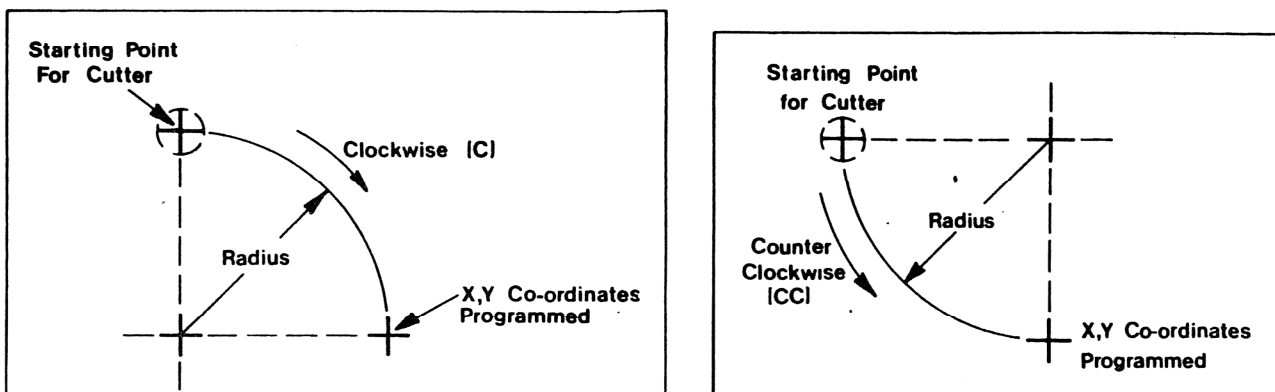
Quarter Circle Mill Routine (Clockwise and Counterclockwise)
